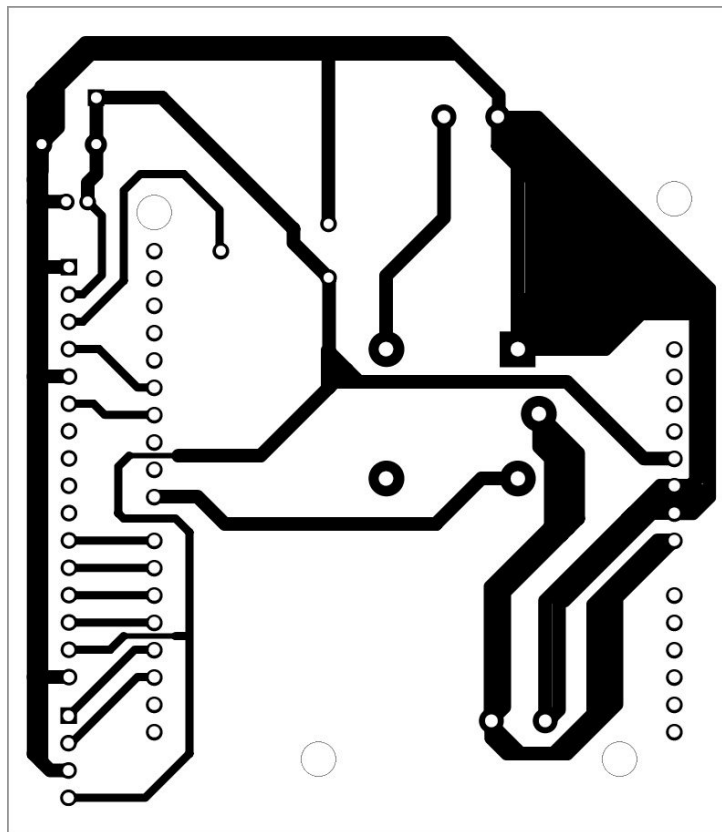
Actual-size PCB pattern of the fingerprint door unlock system
